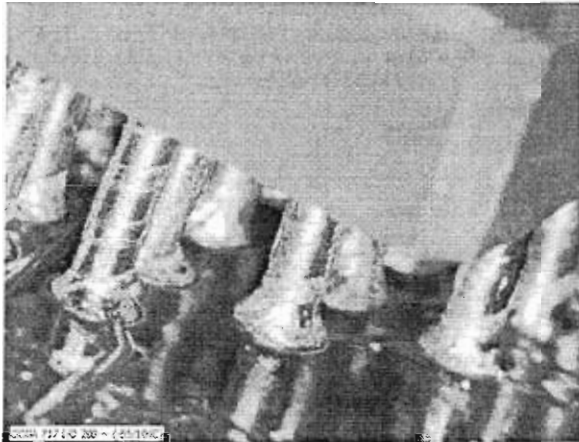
Optical photomicrographs of CCGA built with 8 mil thick stencil after 1459 cycles (-50°/75°C) with cracks in solder joints at the board site and shift of the corner columns towards the package center
